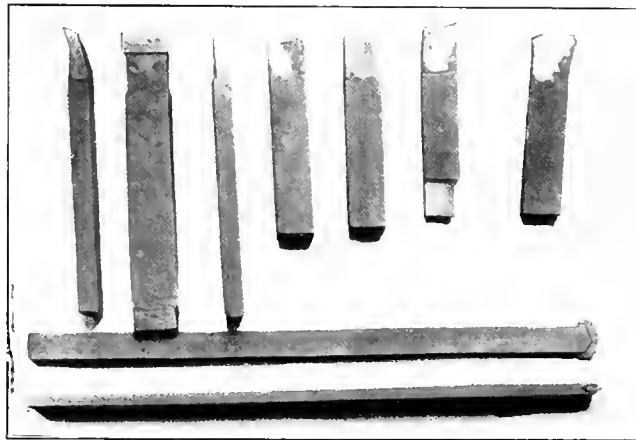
Lathe and Planer Tools, and Spindle Drills tipped with High-speed Steel
